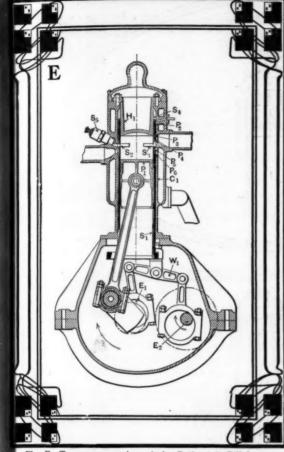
Fig. E.—Transverse section of the Rolland & Pillain motor, showing the method of operating the single sleeve and the location of the spark plugs
